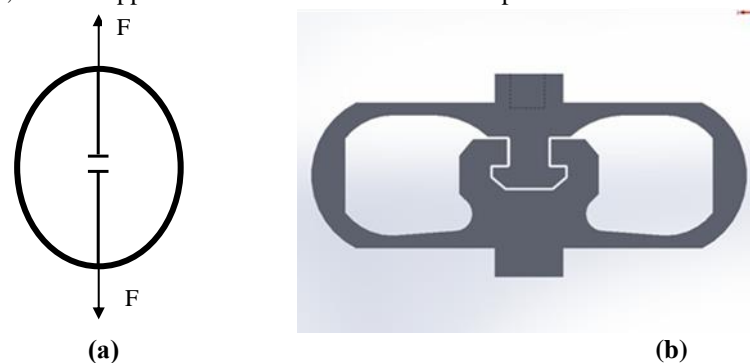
Mechanical transducer mechanism: (a) kinematic scheme; (b) CAD model
